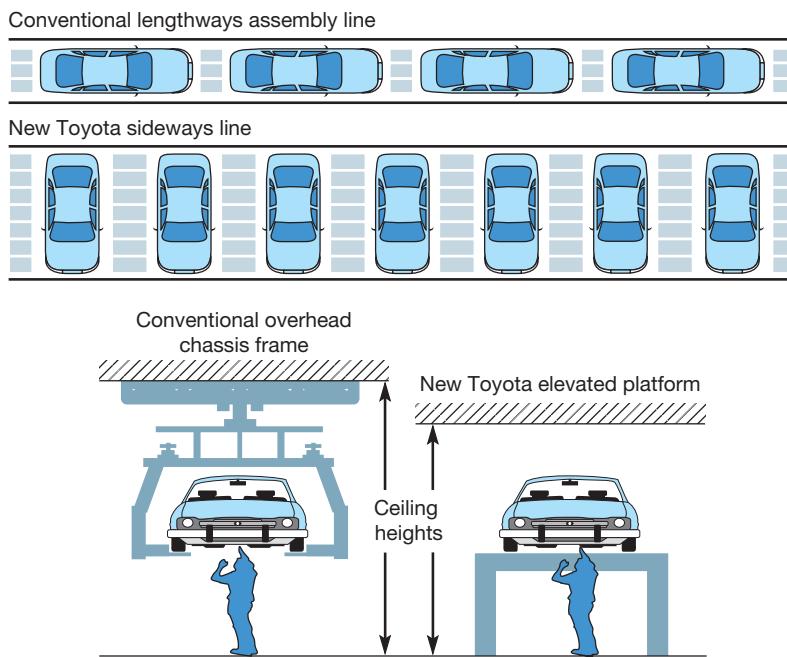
Contrasting arrangements in product (line) layout for automobile assembly plants
